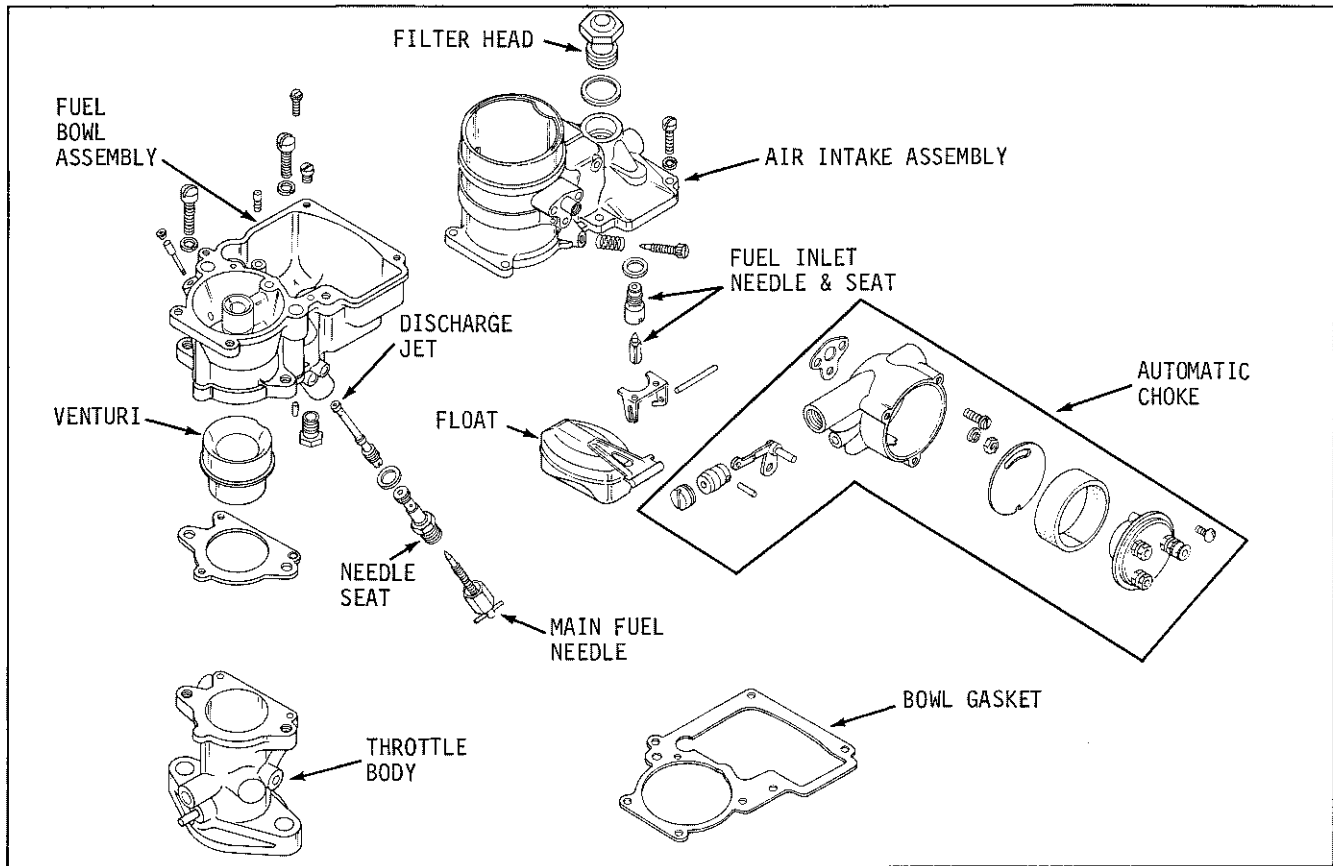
DOWNDRAFT CARBURETOR -- K662 (ZENITH TYPE)
